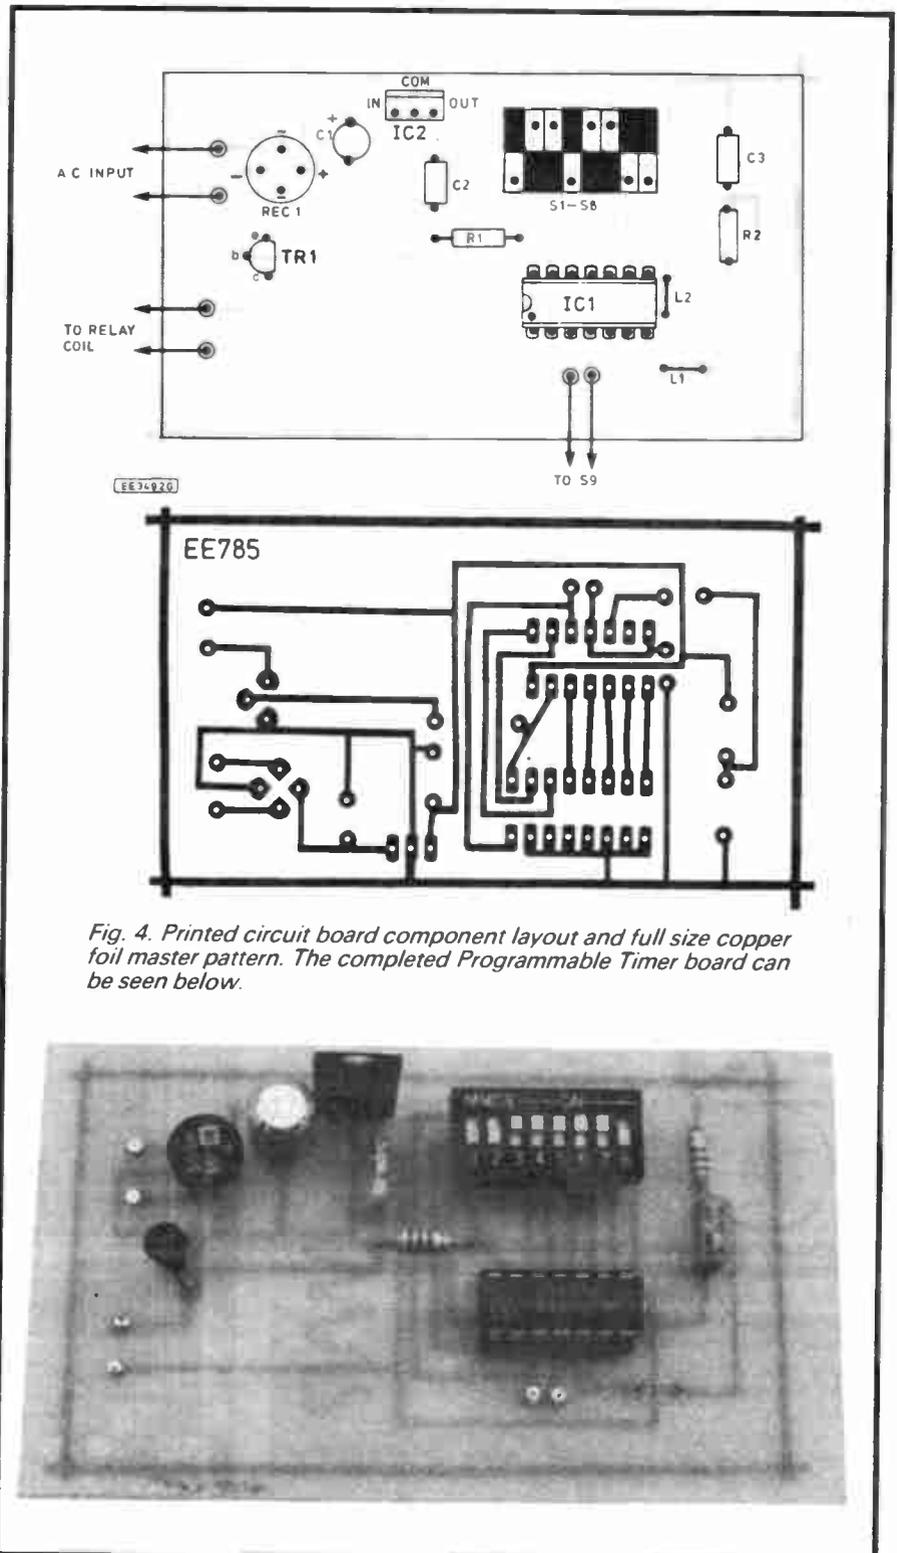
Printed circuit board component layout and full size copper foil master pattern. The completed Programmable Timer board can be seen below.
